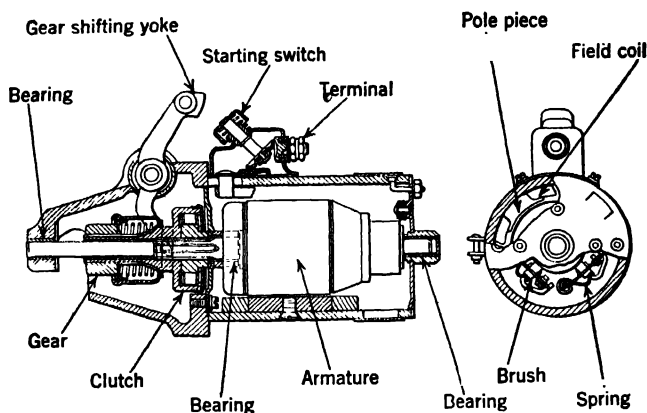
Starter Motor with Mechanical Engagement of Pinion and Flywheel Gear. (Marmon.)
